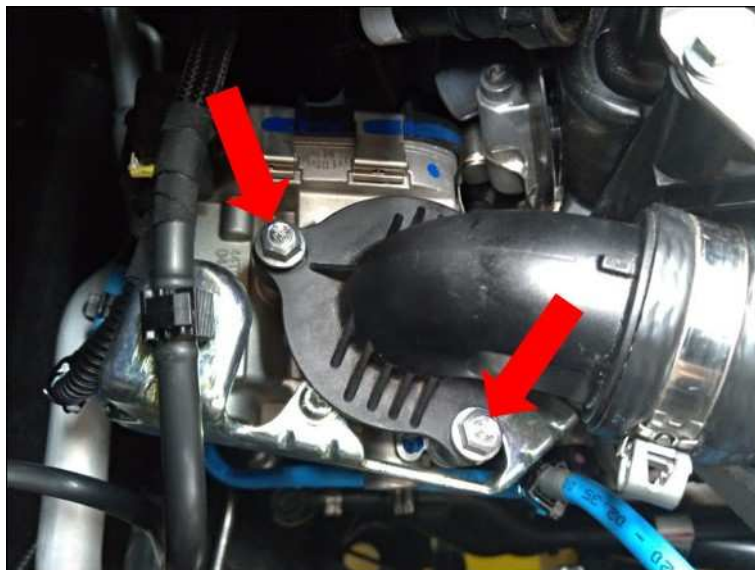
Turbocharger Air Outlet Pipe Bolts
